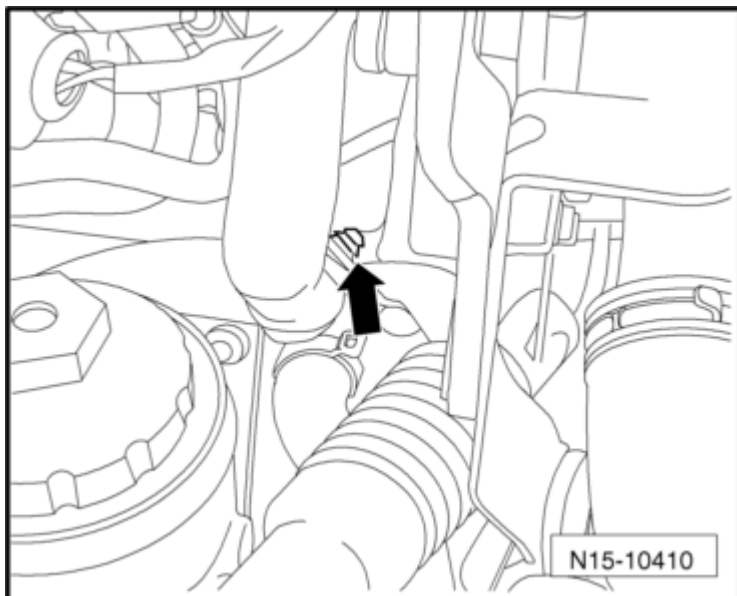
Identifying Engine Control Module (ECM) Wiring Guide -Arrow-
